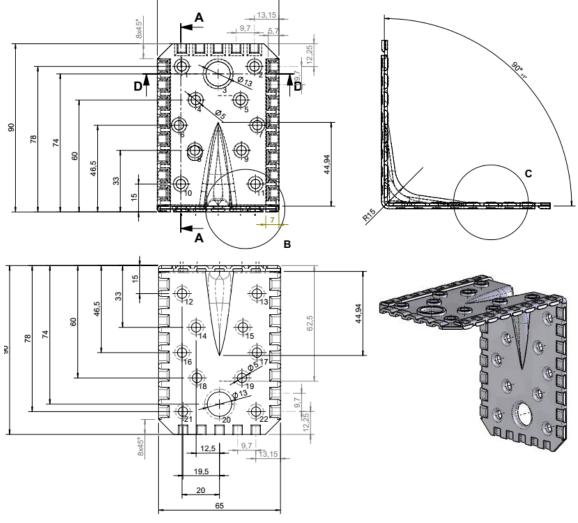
Dimensions of Angle Bracket 90 with rib, thickness 1,5 mm
